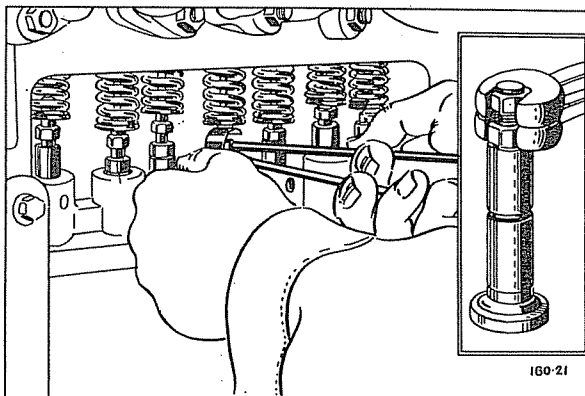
Adjusting Self-Locking Type Valve Tappets.
